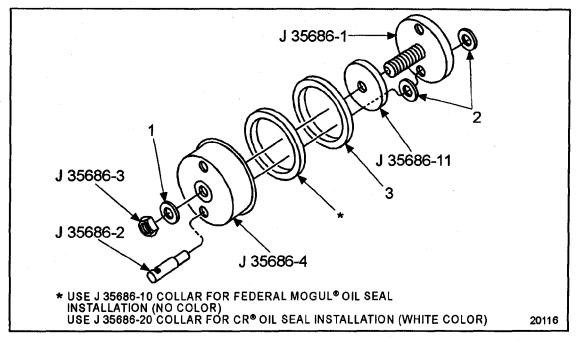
Rear Oil Seal Wear Sleeve Removal
